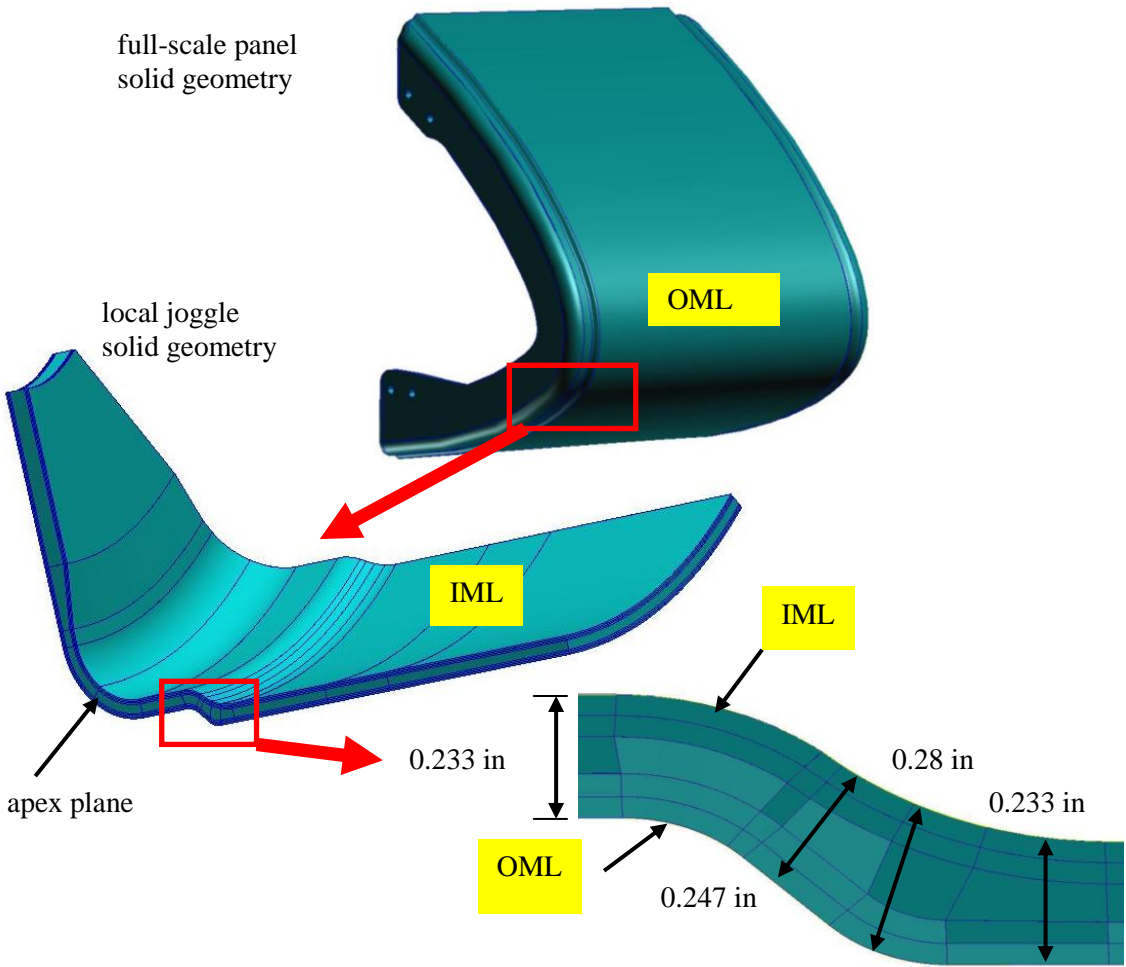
Full-scale Panel 10 solid geometry along with local 8-inch by 4-inch model geometry and close-up view showing detailed dimensions through the thickness of the panel joggle.
